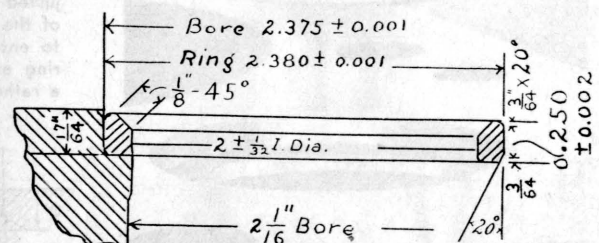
Allis-Chalmers makes the insert of high speed tool steel and rolls in place for locking
